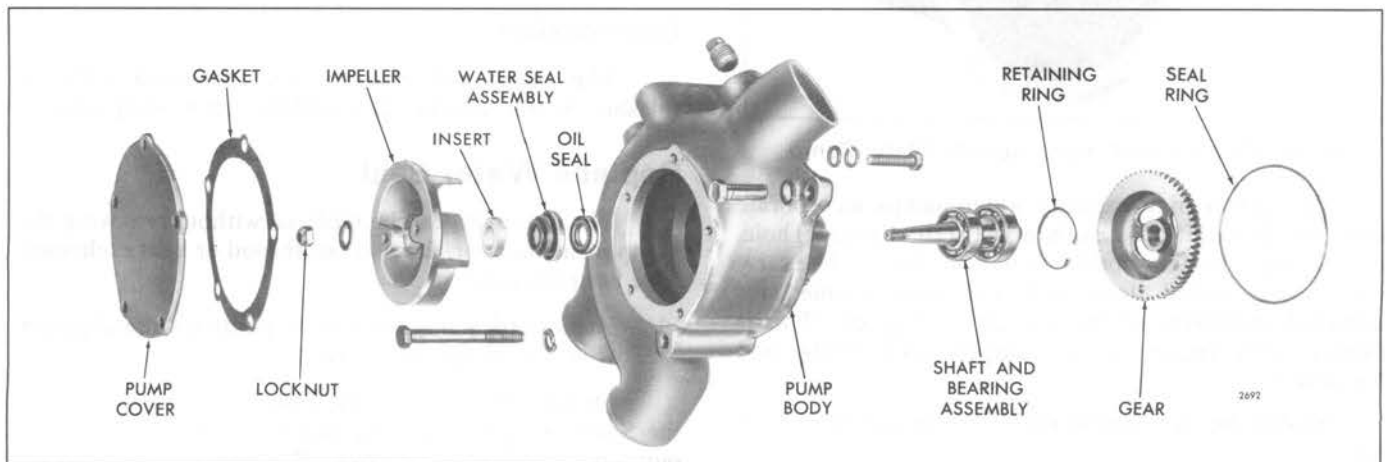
Former Water Pump Details and Relative Location of Parts
